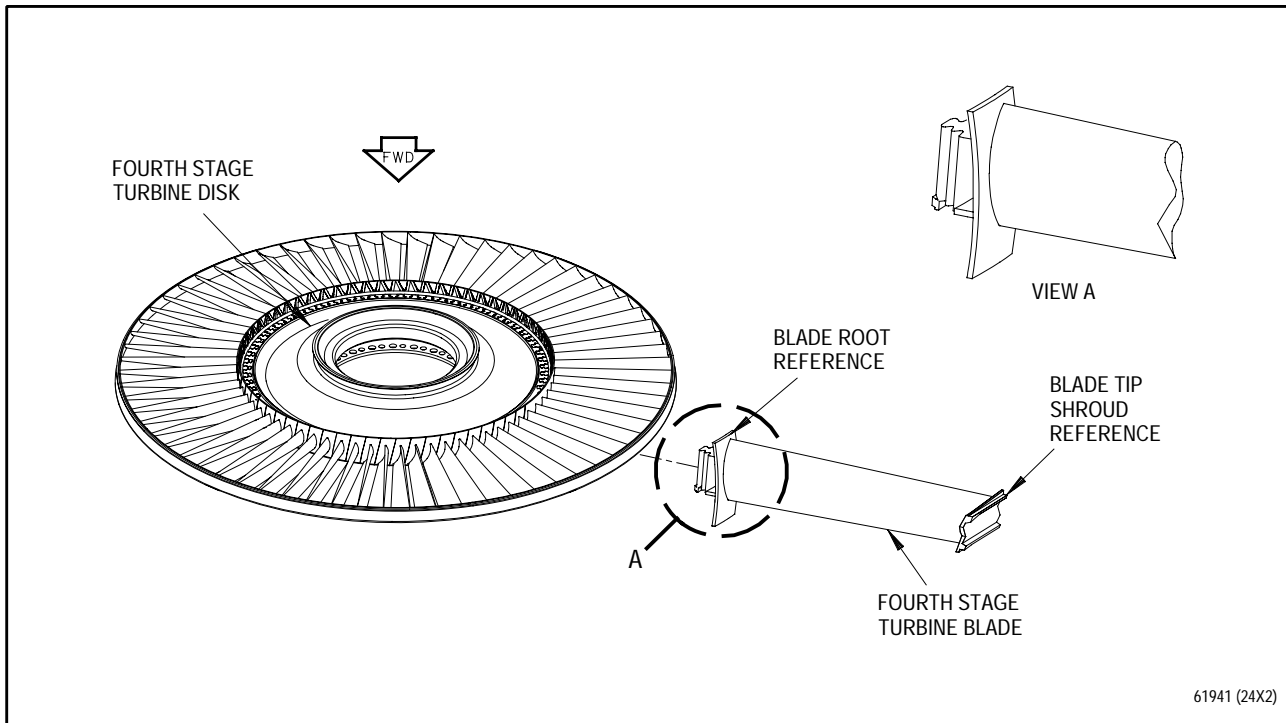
Fourth Stage Turbine Disk and Blades - Disassembly
